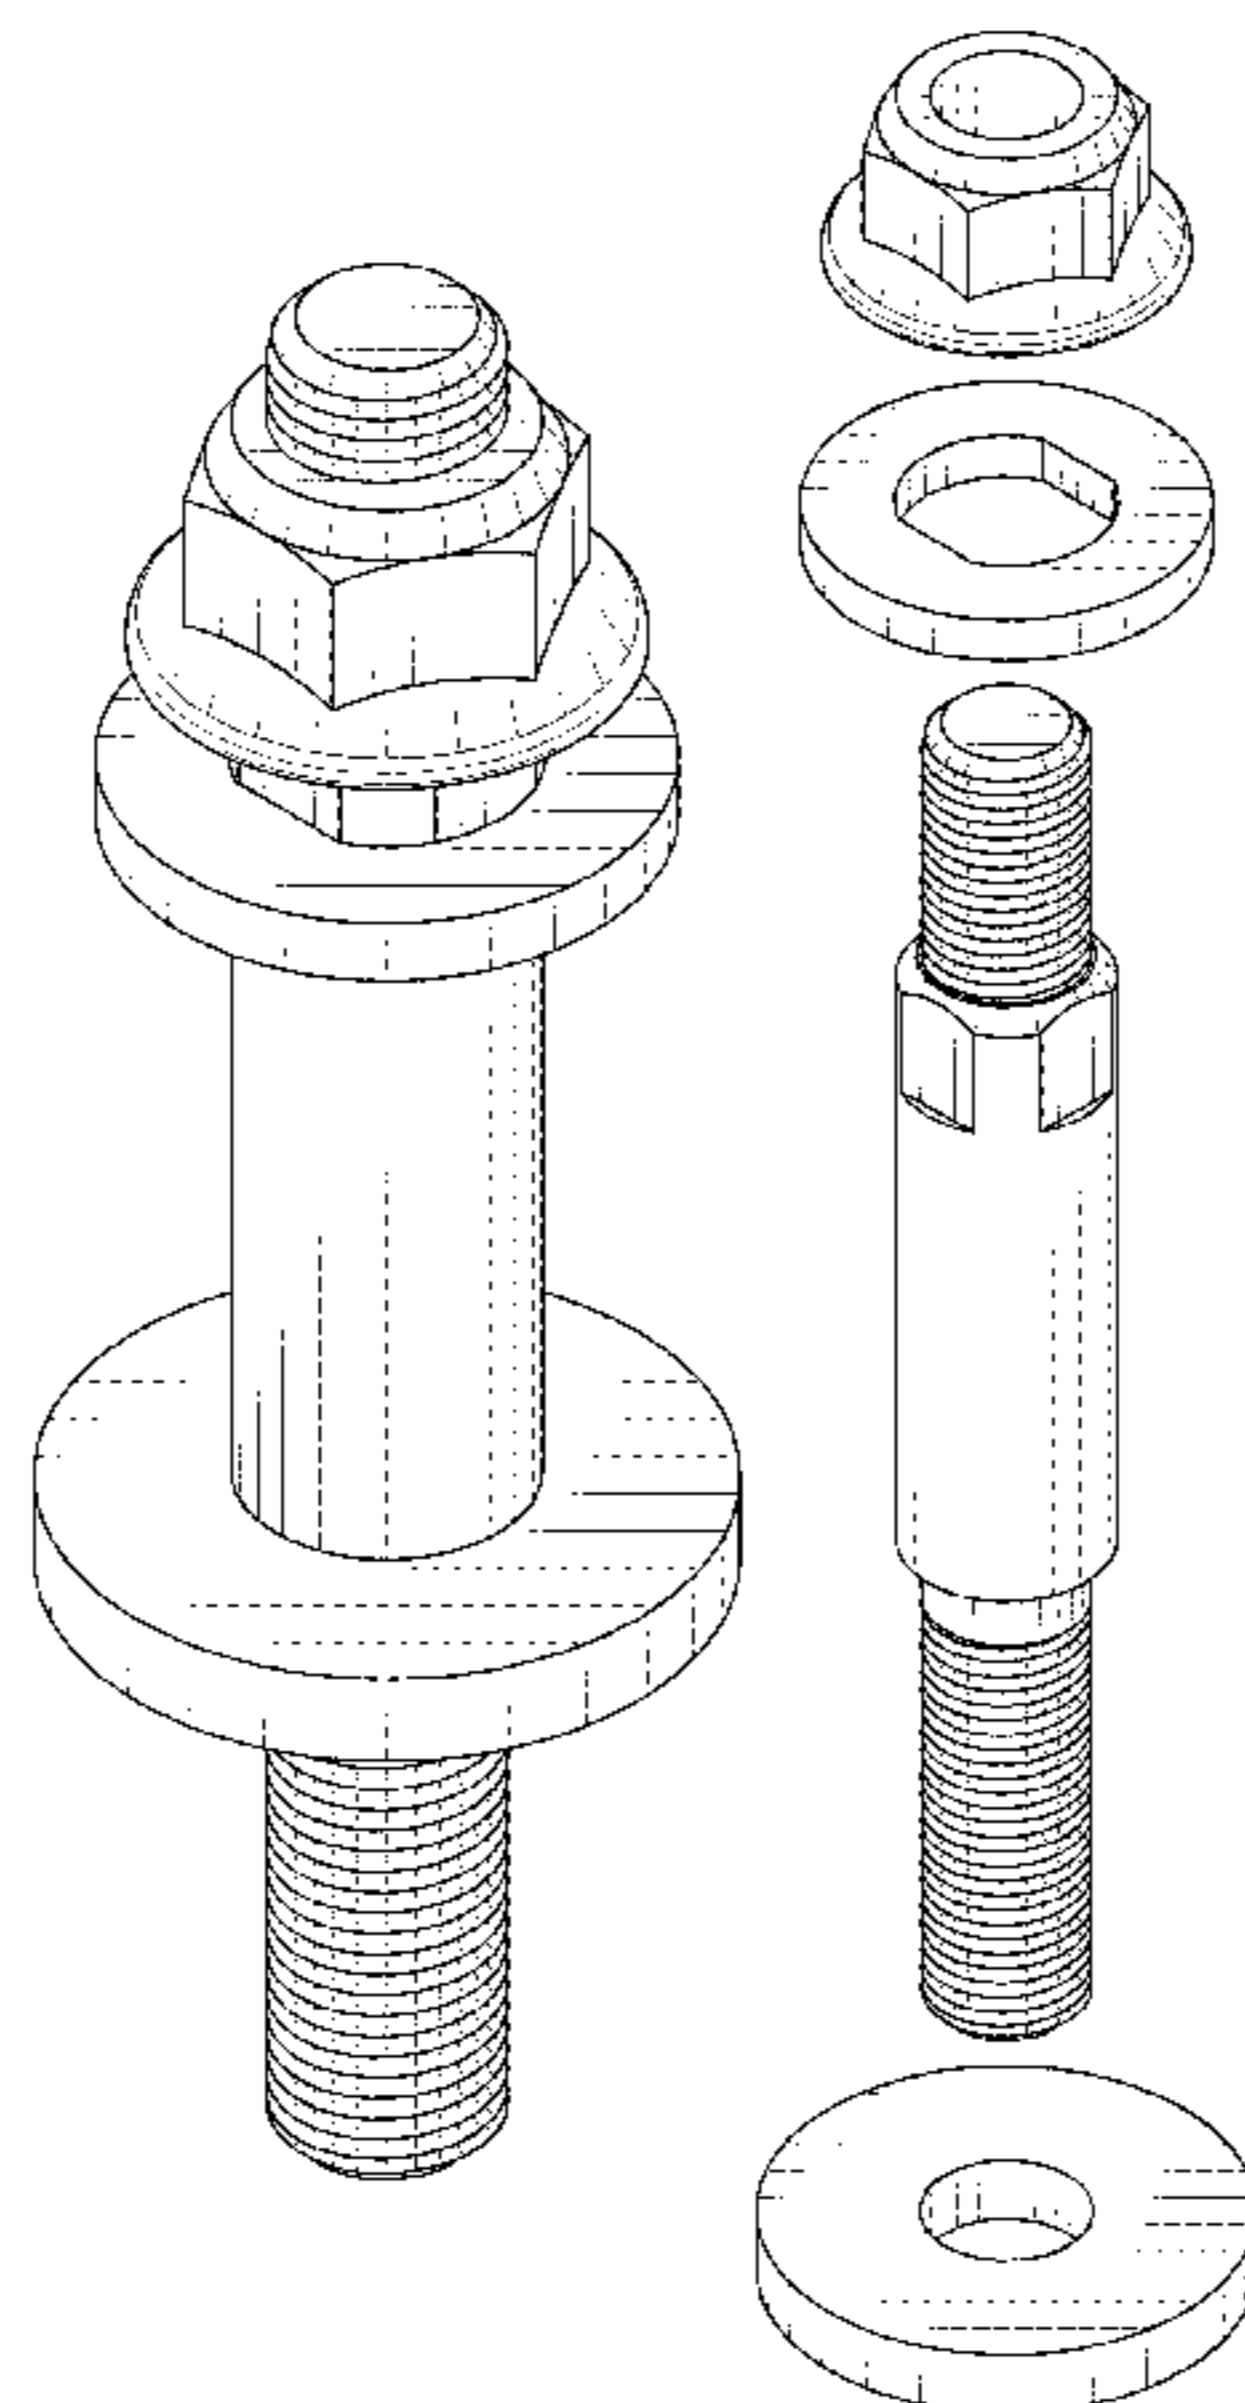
is a perspective view of an engine mount adjustment bolt, showing my new design;
